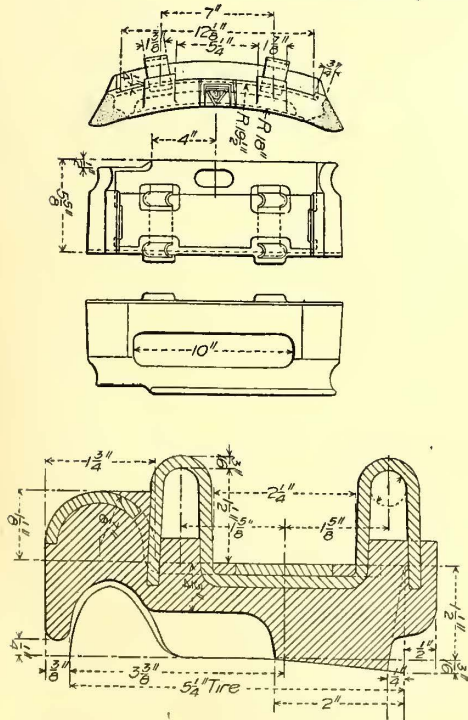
Design of Steel Back Brake Shoe for Motor Trucks on the Manhattan Elevated Division
